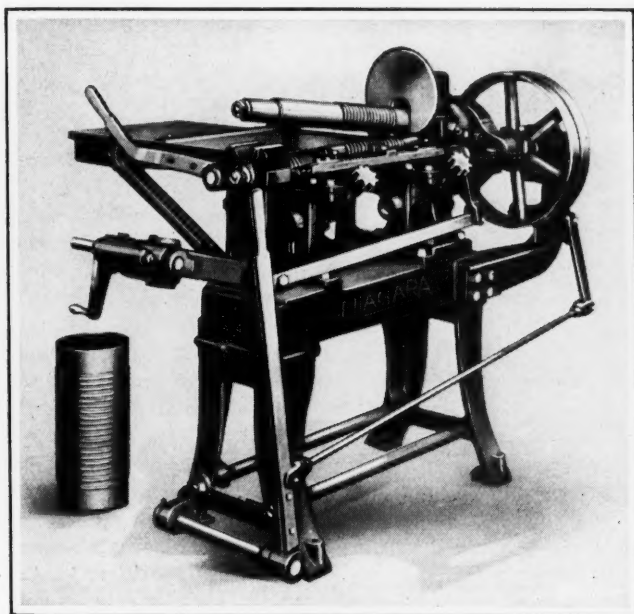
Machine used to roll the Corrugated Sheet into the Form of a Pipe
